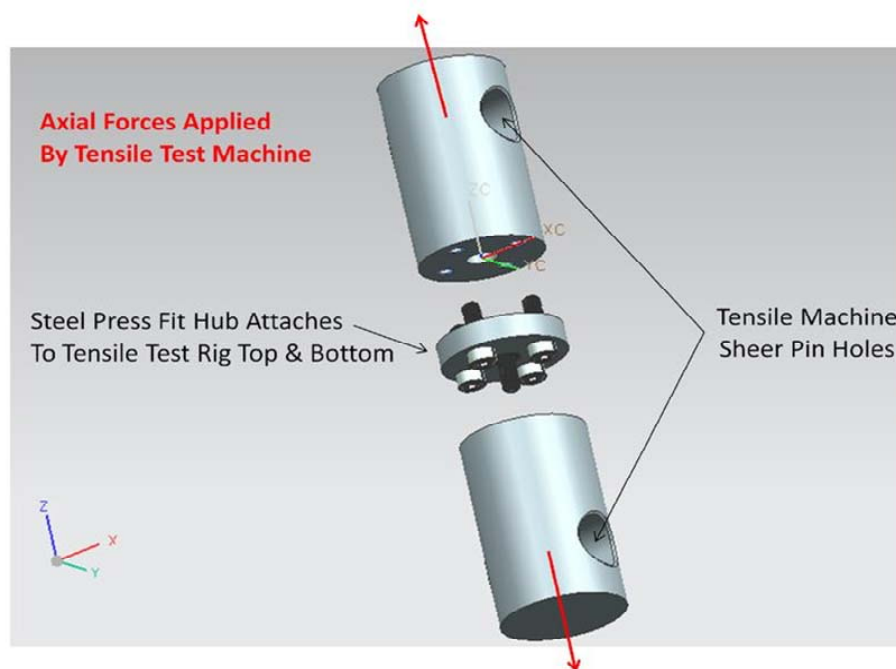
Concept View of SMA²C Tensile Test Rig Configuration and Applied Loading
